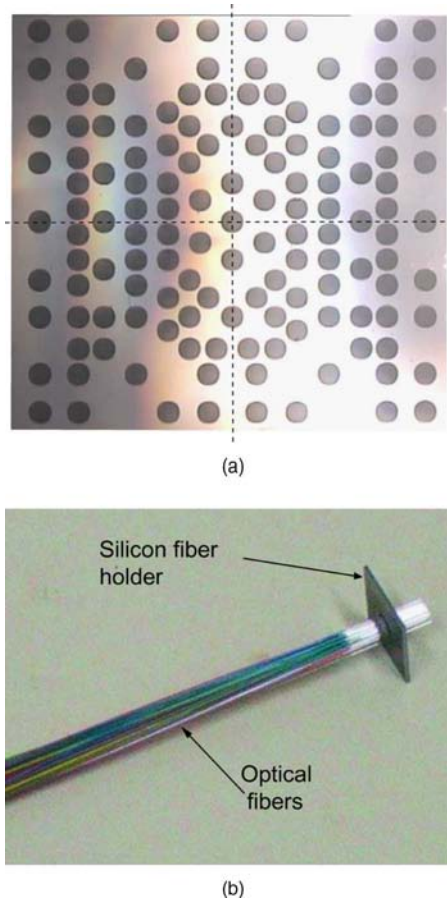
(a) Top view of the bare silicon fiber holder with etched holes. (b) Side view after the fiber threading step.
